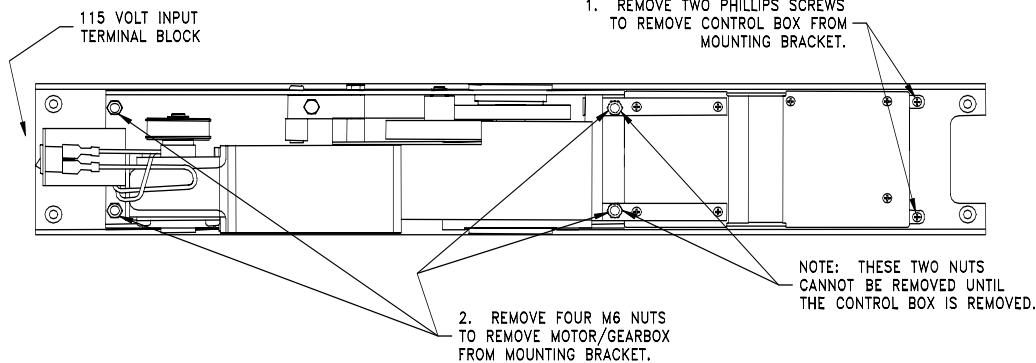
MOTOR/GEARBOX & CONTROL BOX REMOVAL
